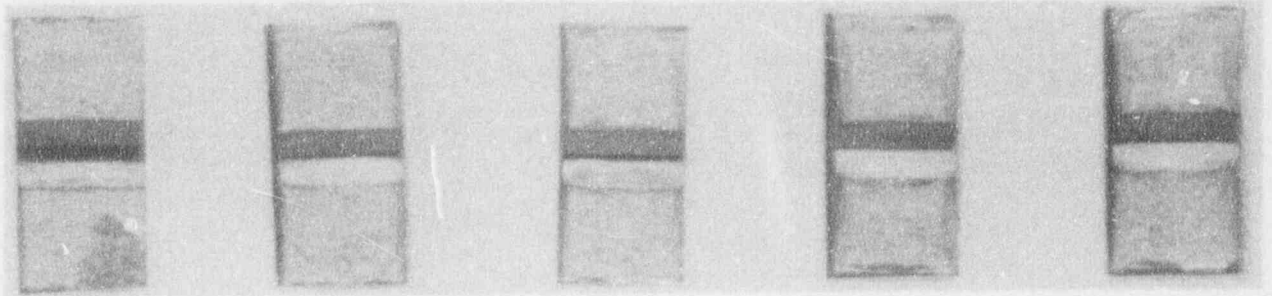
Charpy Impact Specimen Fracture Surfaces for McGuire Unit 1 Reactor Vessel Intermediate Shell Plate B5012-1 (Transverse Orientation)
